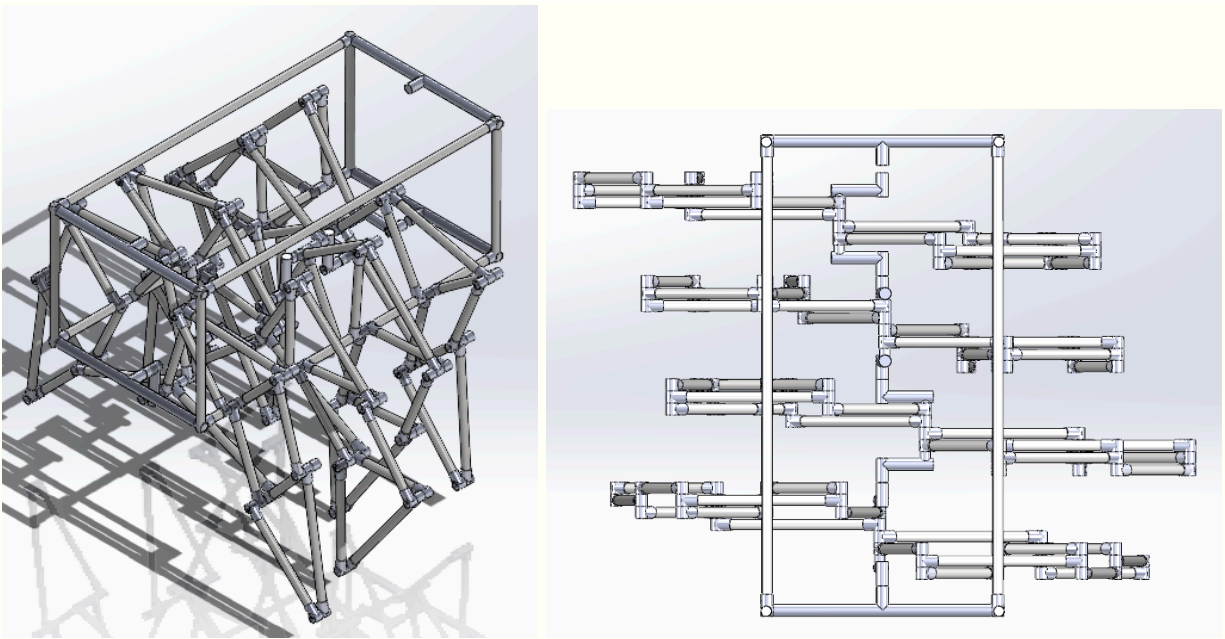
Early Draft Model of Leg, Crank, Frame System
